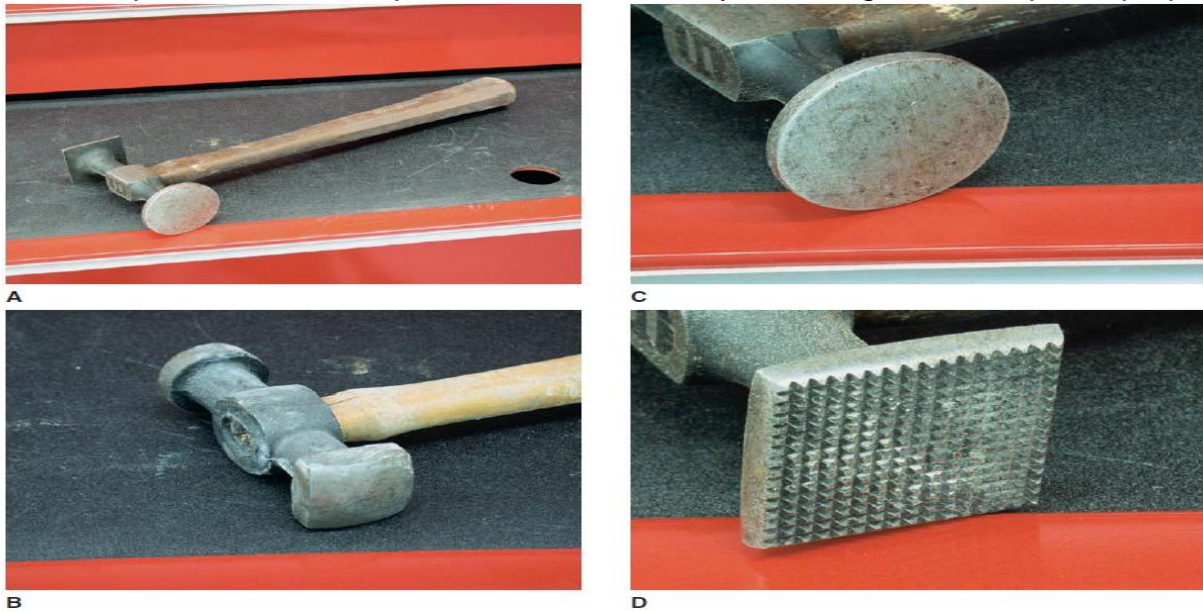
A body hammer and dollies are often needed to take minor dents out of sheet metal. Body hammers have specially shaped heads for working sheet metal. Dollies are specially shaped blocks of steel for straightening sheet metal. Body hammers are the primary striking tools used in collision repair. (A) A body hammer has the head shape for working sheet metal. This one has large flat heads for flattening sheet metal. (B) This body hammer has rounded heads for forcing a curve into sheet metal. (C) This body hammer head is flat and smooth for working damage out of sheet metal. (D) The serrated body hammer head will shrink metal after it has been stretched from collision damage.
